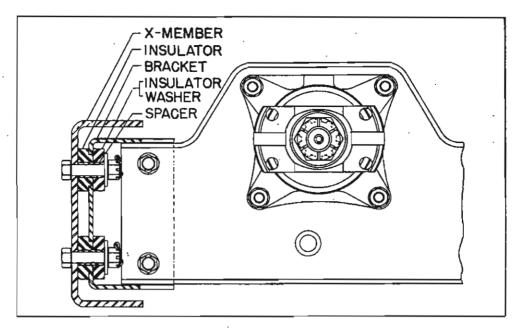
Intermediate Bearing and Bracket Assembly Used in 22nd Series Long Wheelbase Models.
